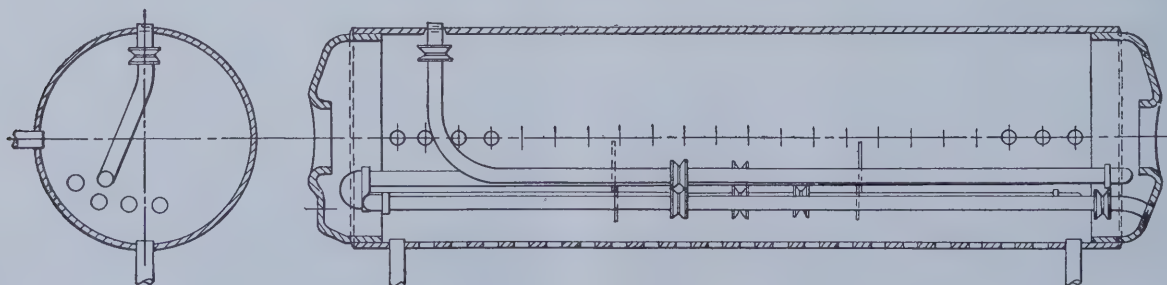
Coil type of convection desuperheater located in boiler steam drum for supplying auxiliary steam
